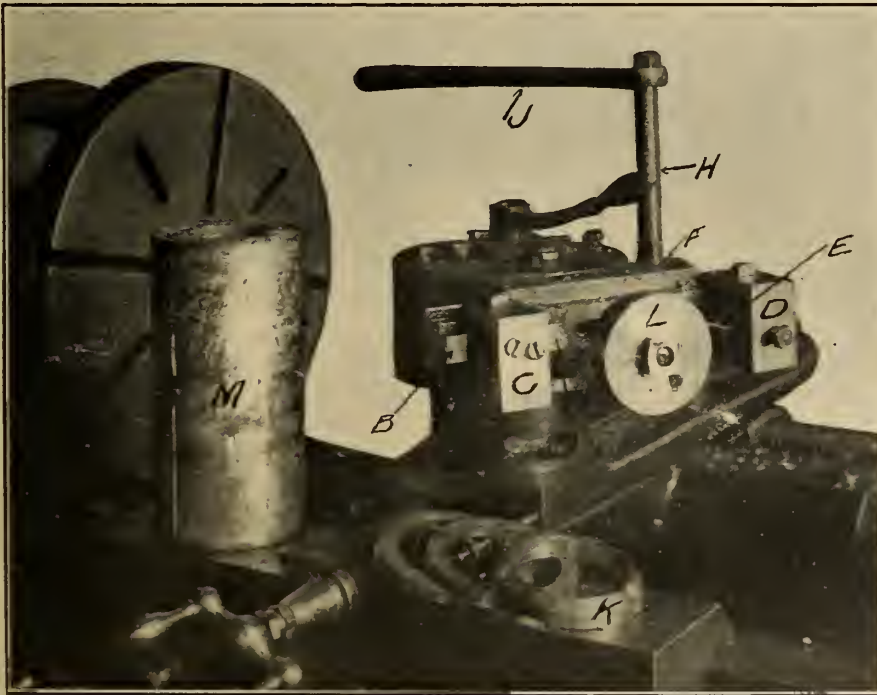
Jig for Producing Sets of Valve Stem Packing.
